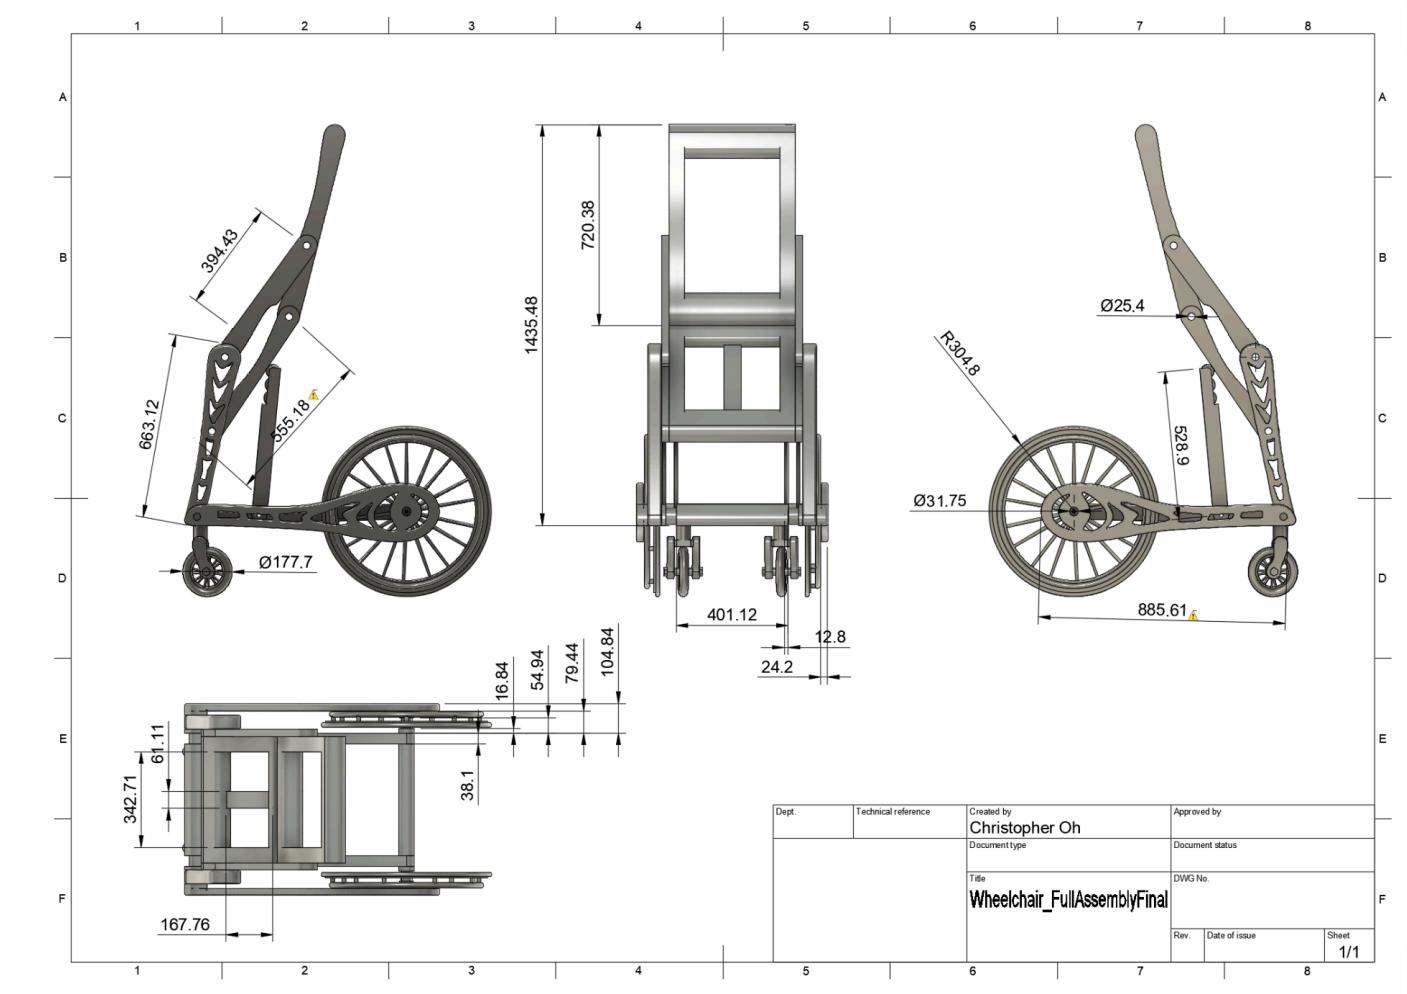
EZ Sit Full Assembly Drawing with Dimensions
